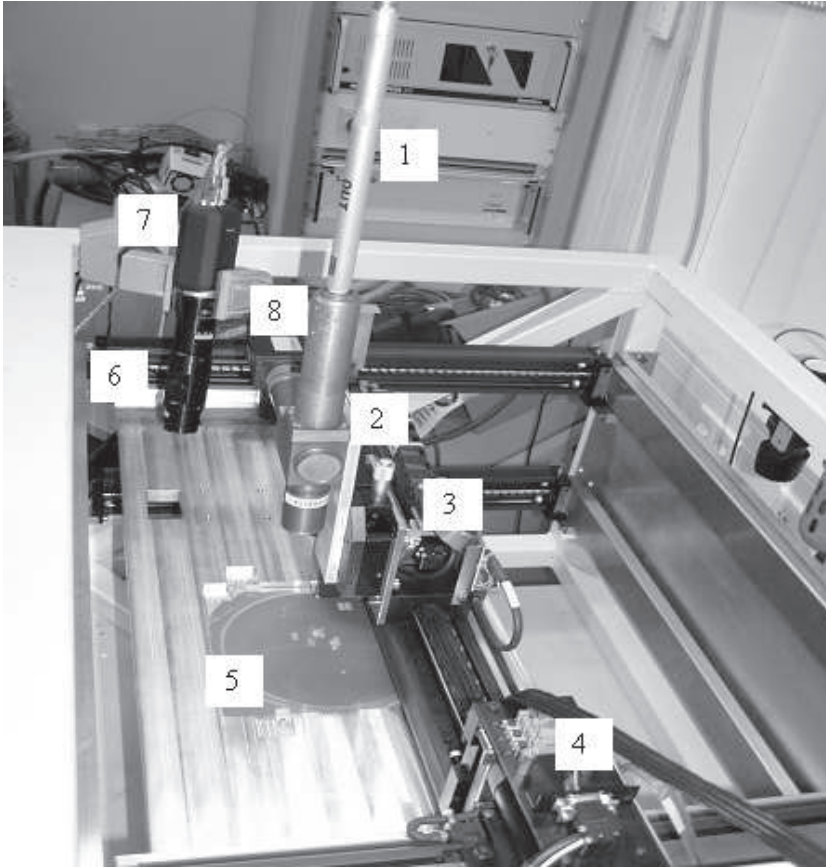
Photograph of the demonstrator LDT set-up: 1. fiber; 2. optical head; 3. X-robot; 4. Y-robot; 5. wafer; 6. zooming system; 7. camera for caught dies observation; 8. camera for laser alignment; 9. frame
